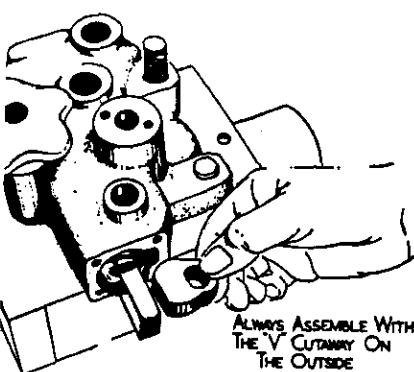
When installing cam in cam stirrup, position "V" cutout as shown.
